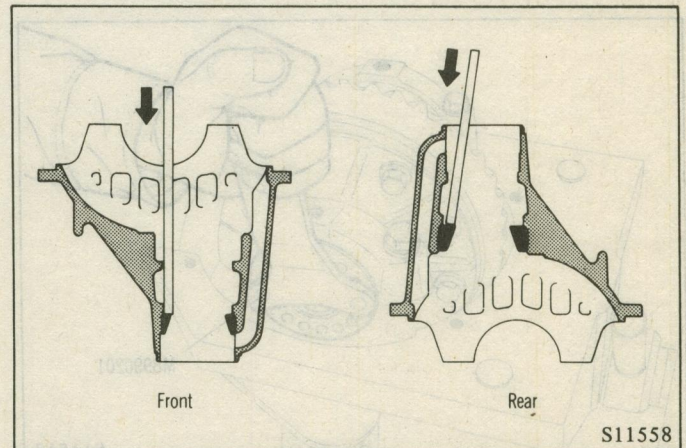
Removing the Outer Race of Drive Pinion Bearing (Front and Rear)
